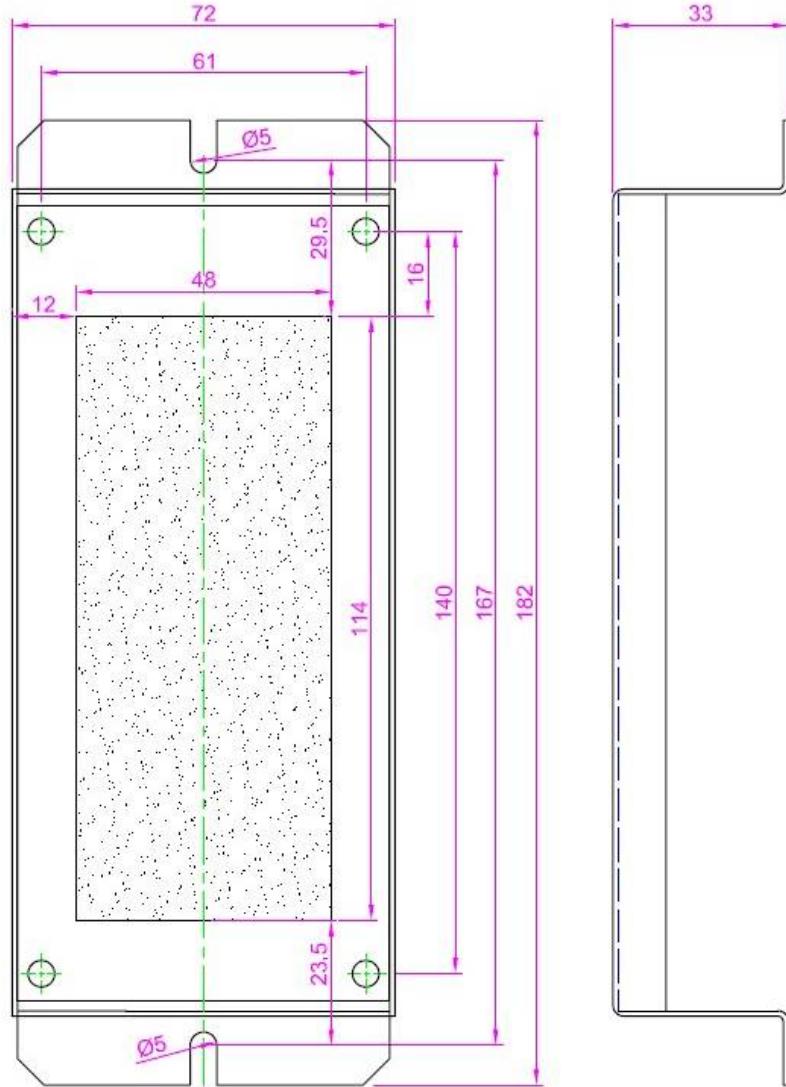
Mounting Dimensions of SM-04-VL16/A
